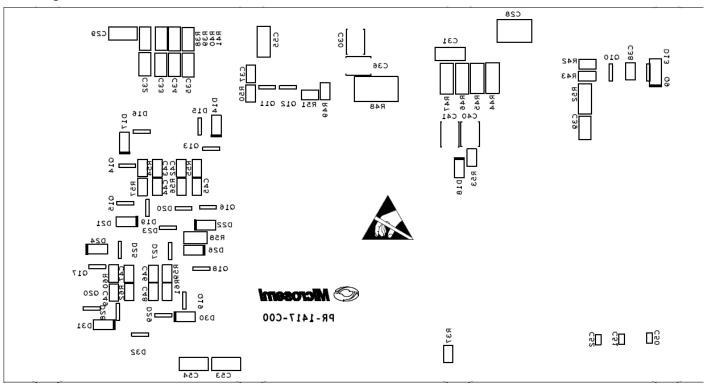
PD70201EVB60F12 EVB PCB Silk Bottom Mirror
